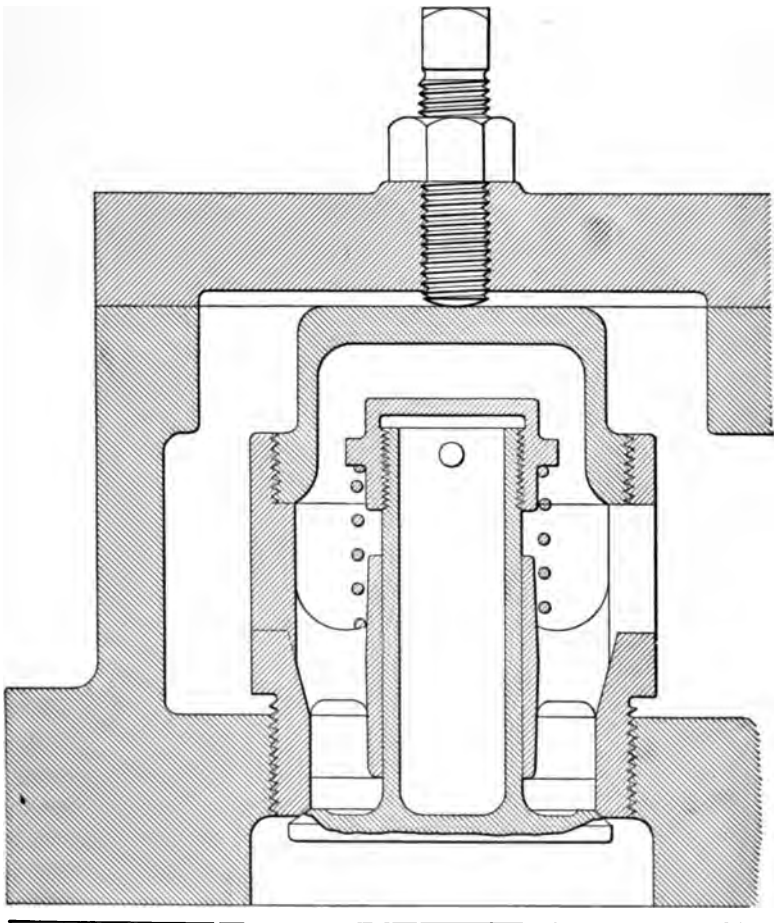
Laidlaw-Dunn-Gordon Poppet Inlet Valve.
